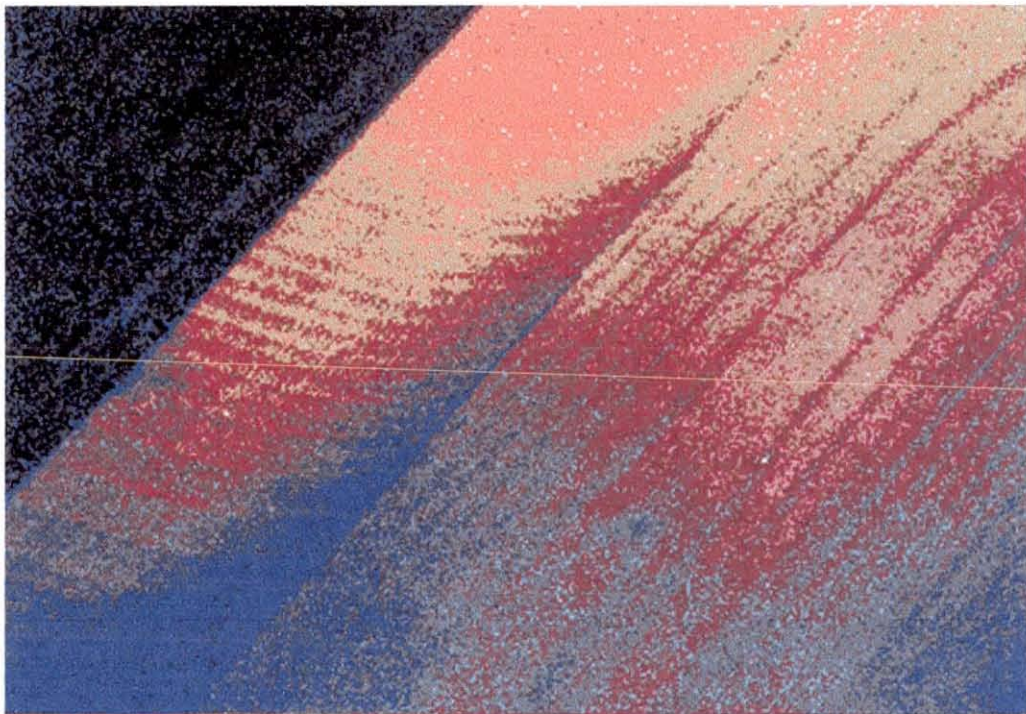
Cuttermarks produced on machined timber surface
